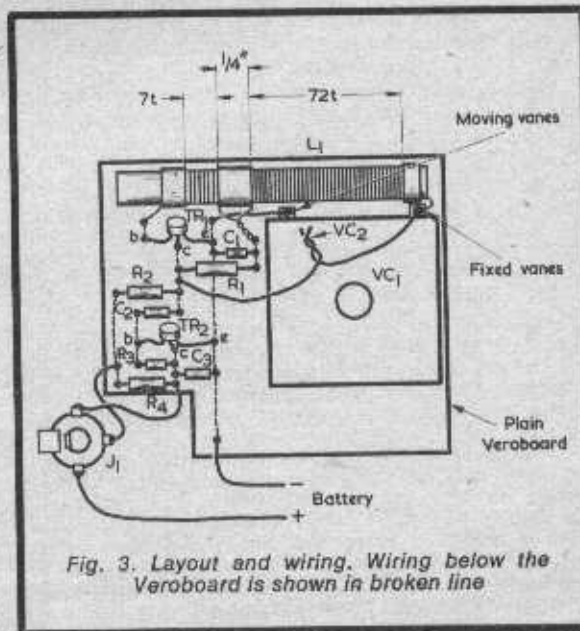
Layout and wiring. Wiring below the Veroboard is shown in broken line
